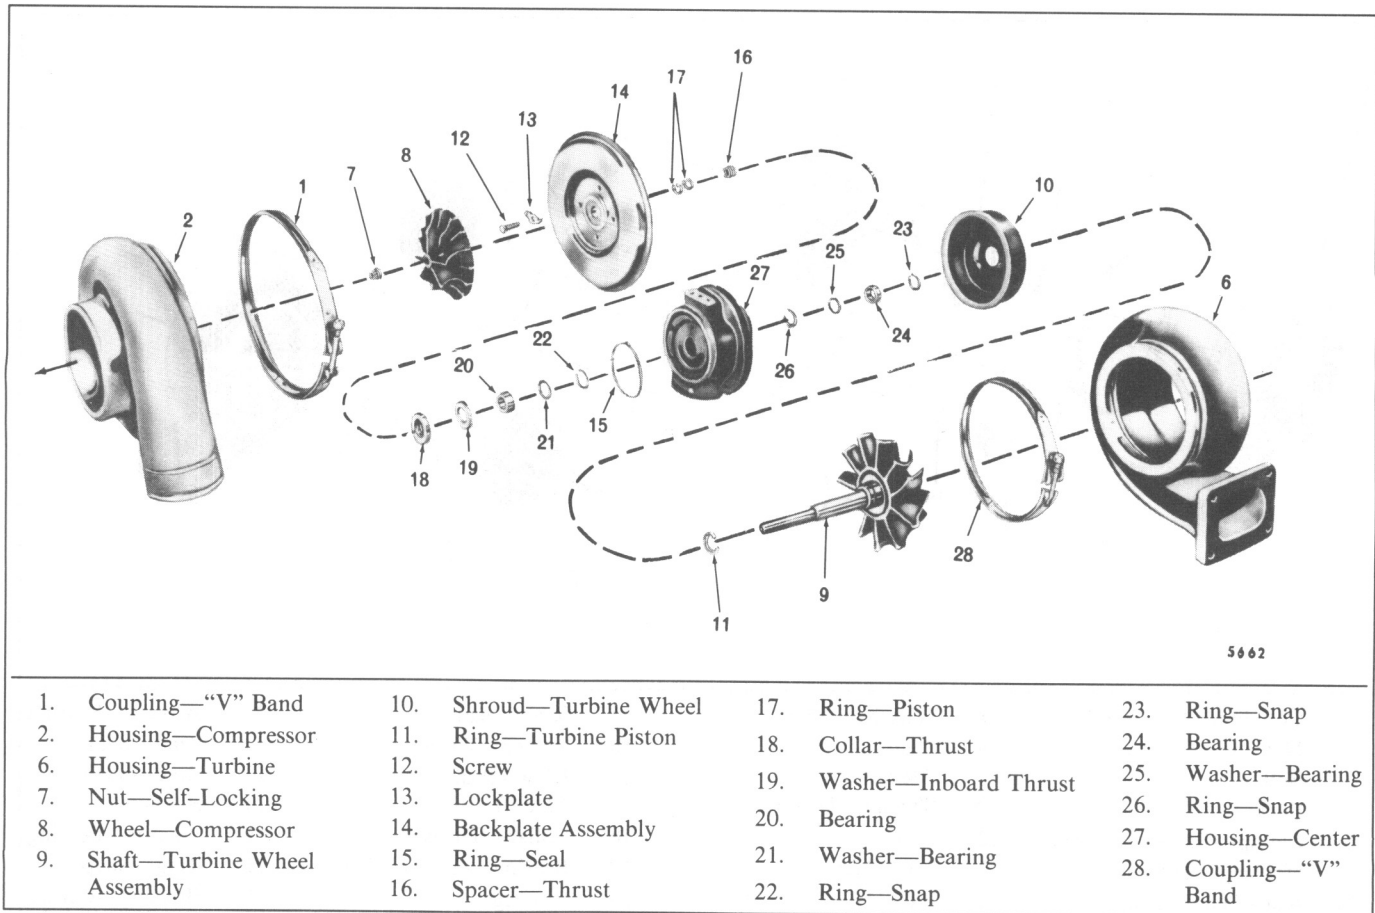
TV71 and TV81 Turbocharger Details and Relative Location of Parts
